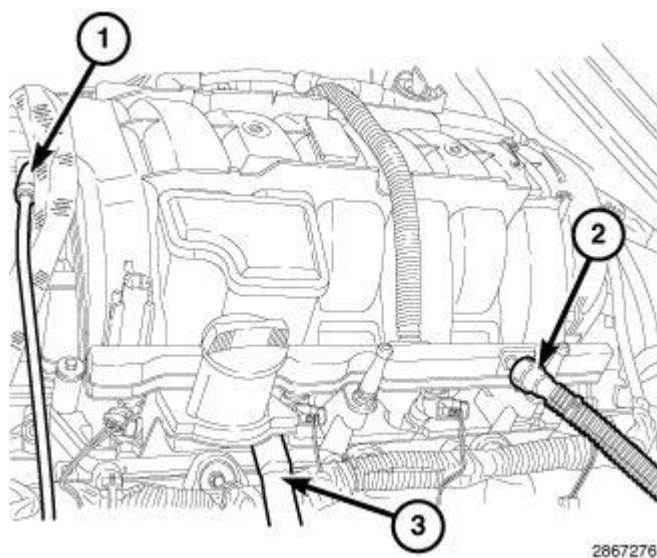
EVAP Vacuum Line, Fuel Supply Line & Make Up Air Hose
